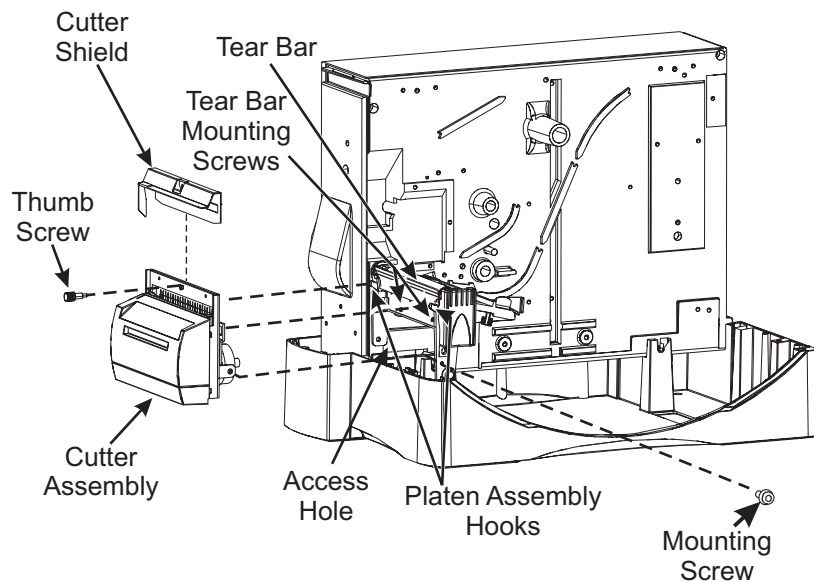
Installing the Cutter Assembly (Z4M Shown)
